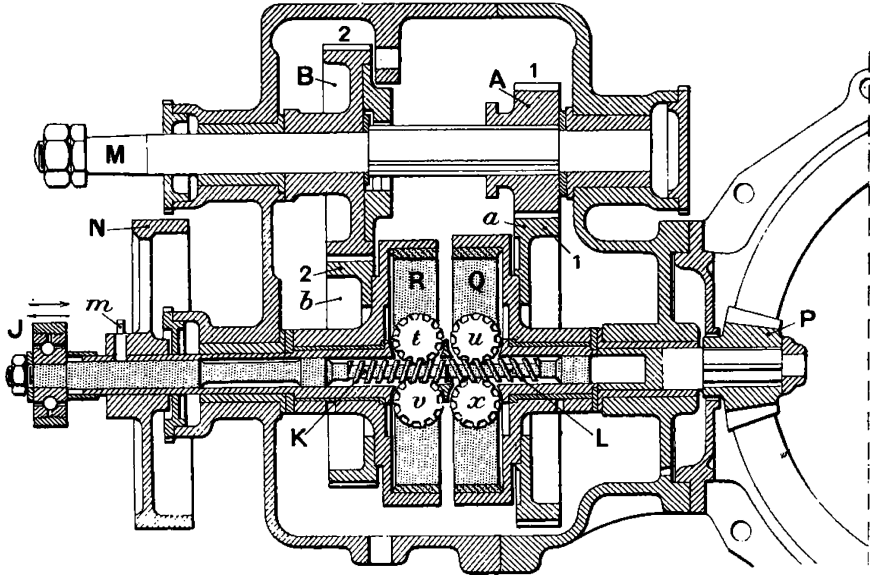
The De Dion & Bouton gearbox can be considered as a precursor to power-shift gearboxes. By shifting the shaft with the bearing J, it is possible to engage one of the two shoe clutches available on each gear; a start-up clutch is not necessary.
